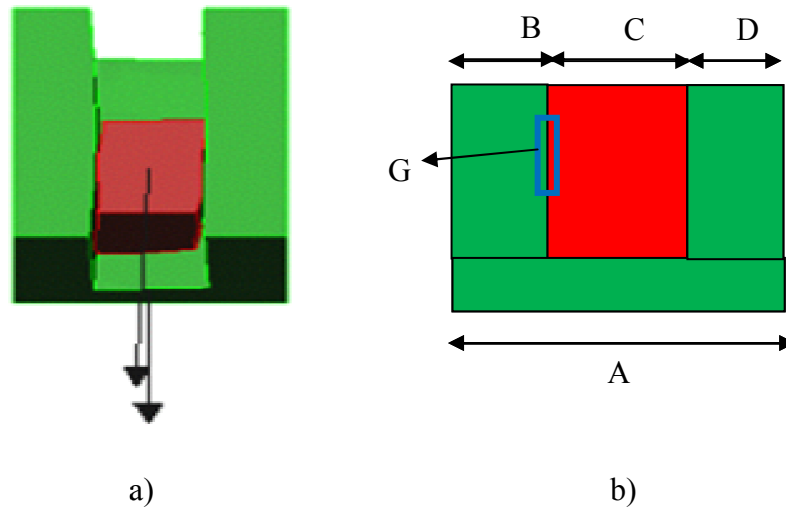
Block-Slider assembly a) Isometric view b) Front view
